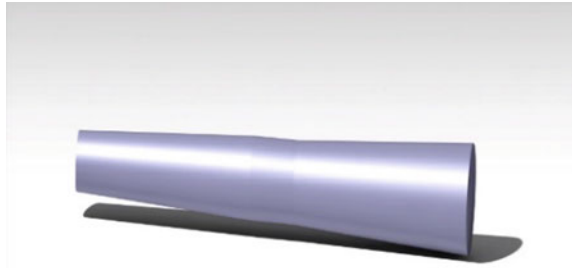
3D model of circular —to—clover combustor scramjet engine
